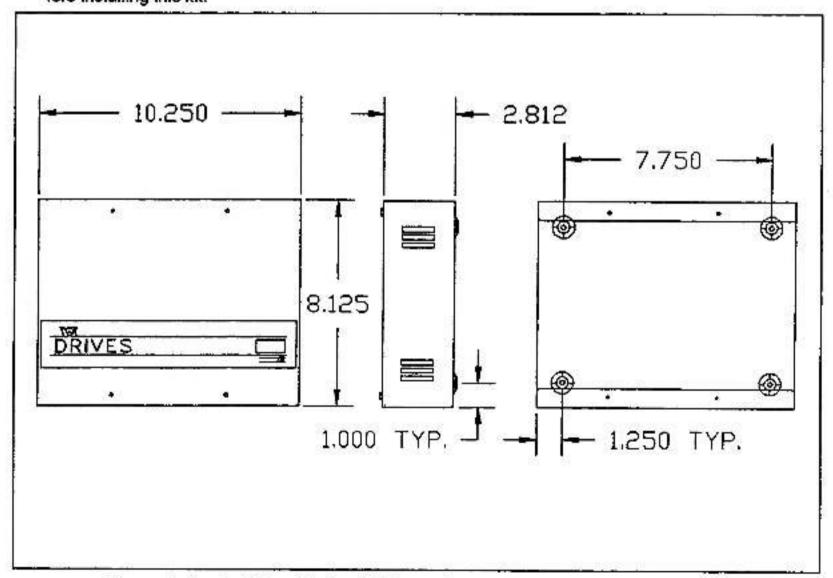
Control Signal Buffer Kit Dimensions and Mounting Hole Locations.
